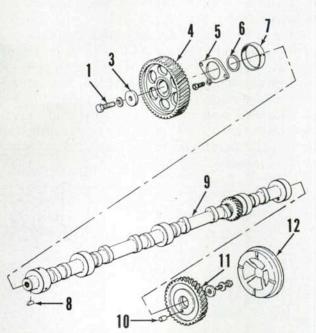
View showing assembly of camshaft gear to camshaft. The thrust plate (5) controls camshaft end play.
